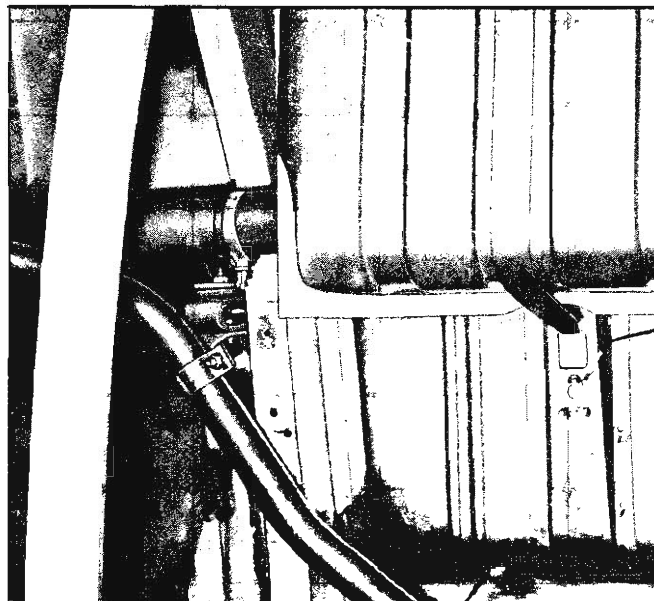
Exhaust System Mounting at End of Tail Pipe
